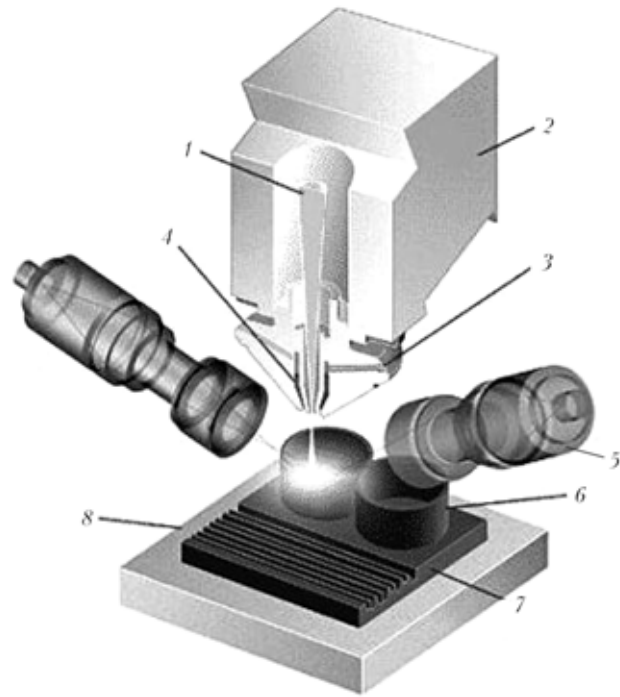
Flow diagram of the process of 3D synthesis of parts by the DMD technology: 1 — CO₂-laser radiation; 2 — focusing optics; 3 — powder feeding; 4 — shielding gas; 5 — sensors of optical feedback system; 6 — piece being formed; 7 — billet or mould; 8 — platform
